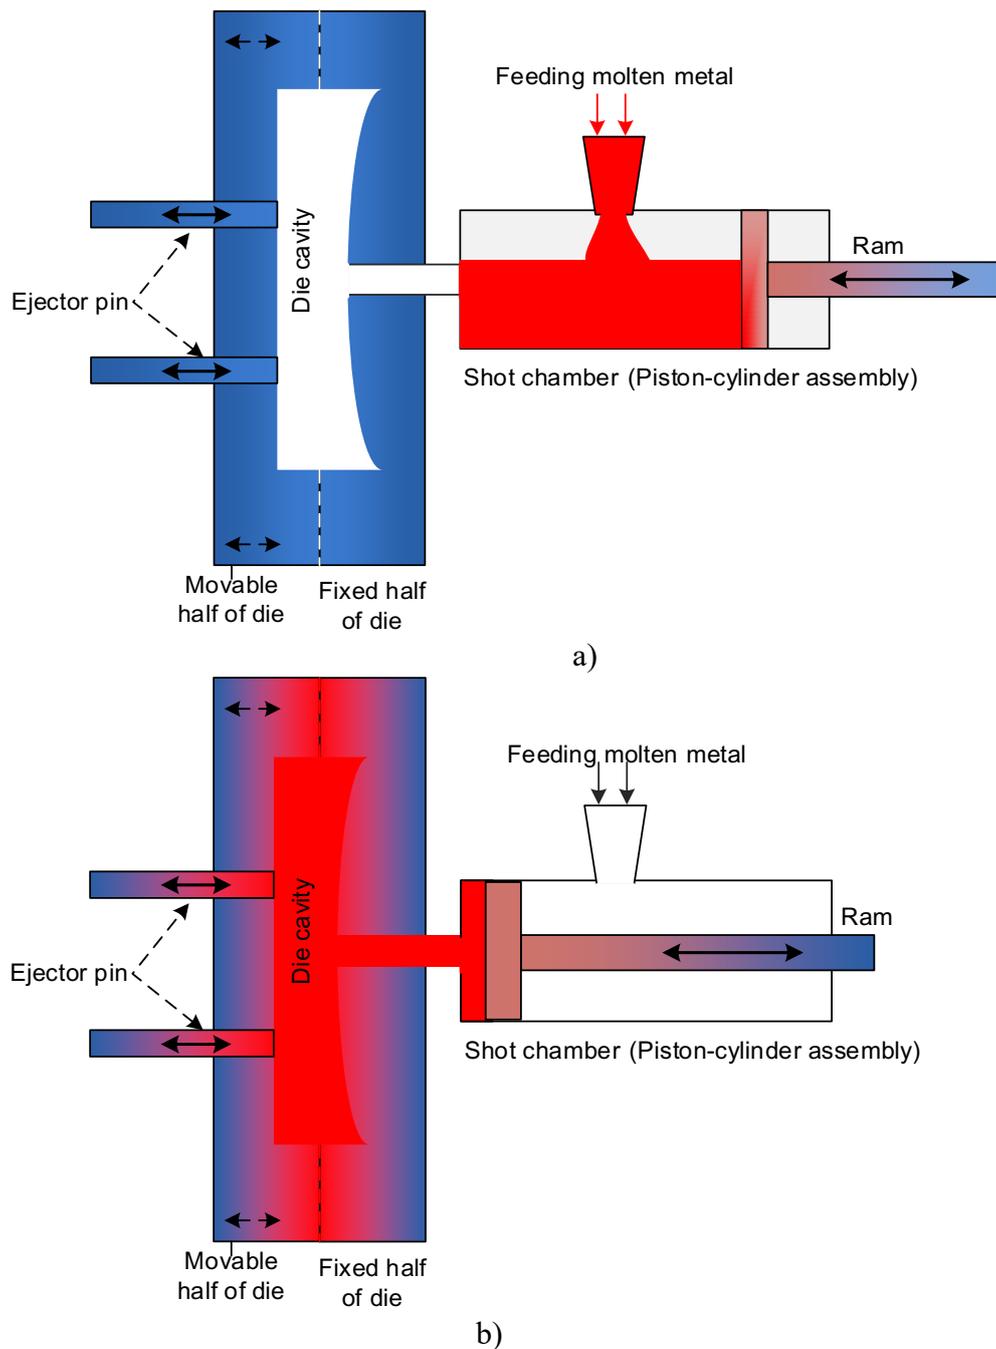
Schematic showing cold chamber die casting a) filling of molten in the shot chamber of die cavity and b) the molten filled in die cavity under pressurised condition followed by solidification.
